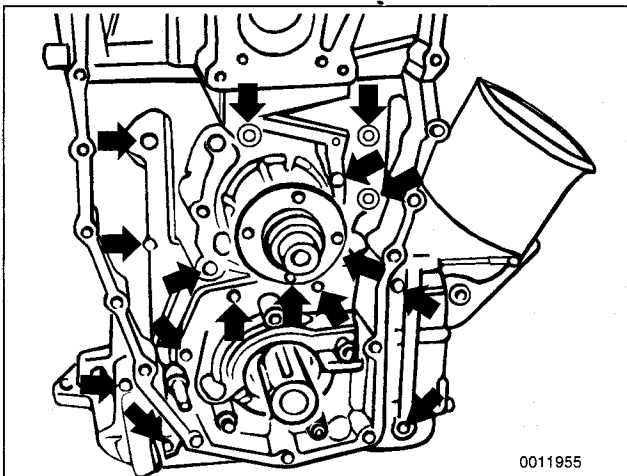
Timing chain case mounting bolts (arrows) on M44 engine.
